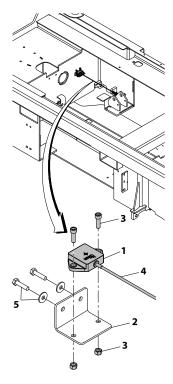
Tilt Sensor Installation (pot-hole bar removed for clarity)
